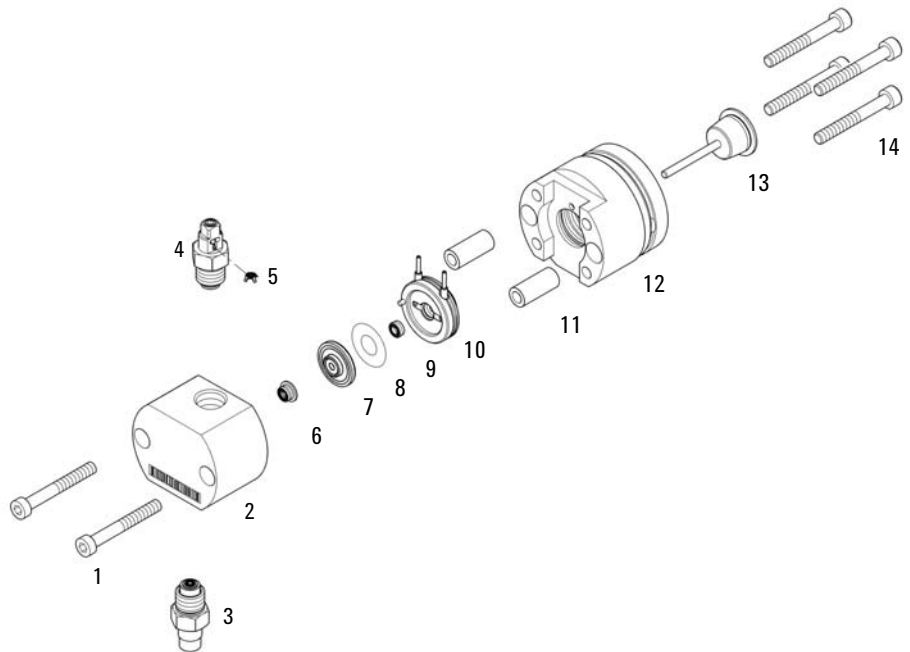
Primary pump head (Quaternary Pump) with seal wash
